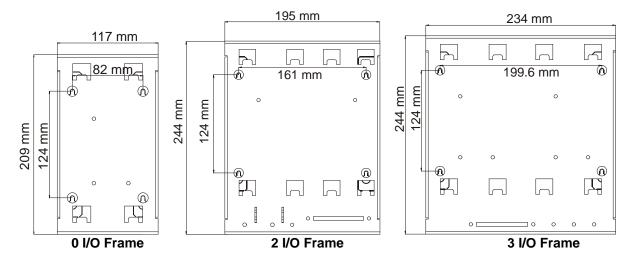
No I/O, 2 I/O, and 3 I/O Frame Installation Dimensions and Screw Holes for Installation
